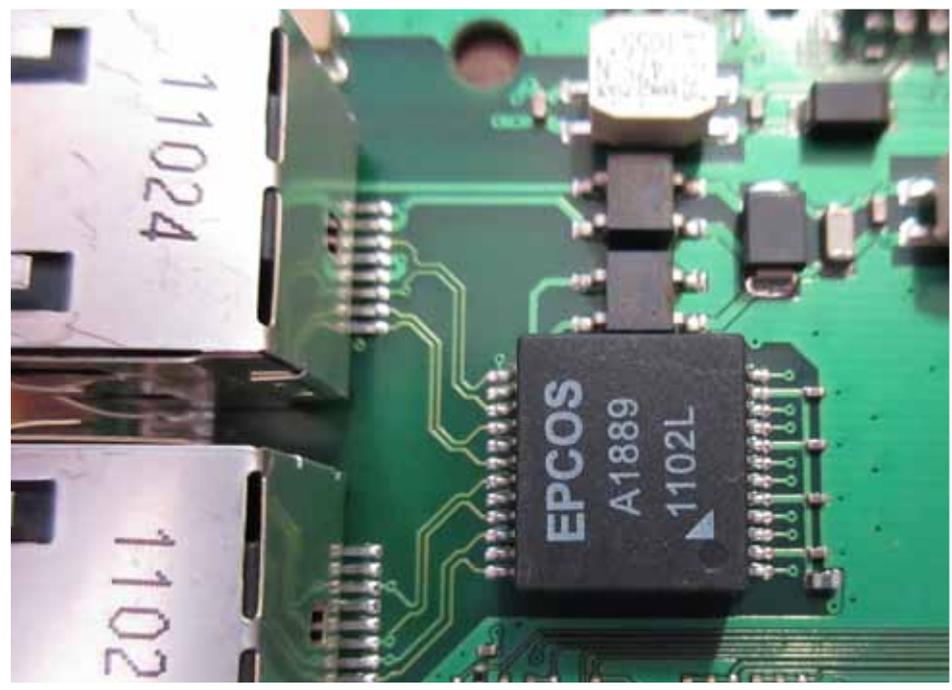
view showing IP Phone PCB area close to ethernet connections.
